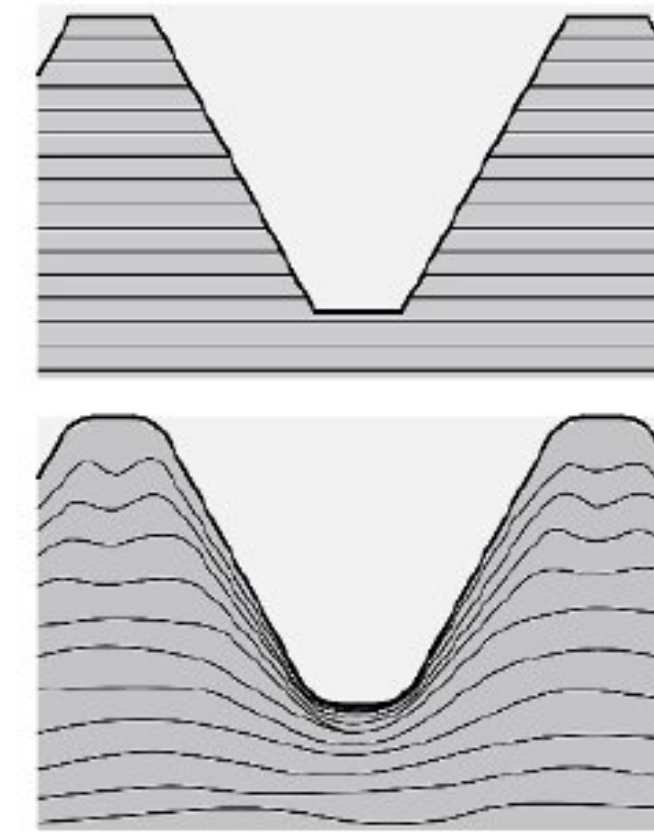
Strands immediately below the surface of the thread: top-cut thread; bottom-rolled thread.
